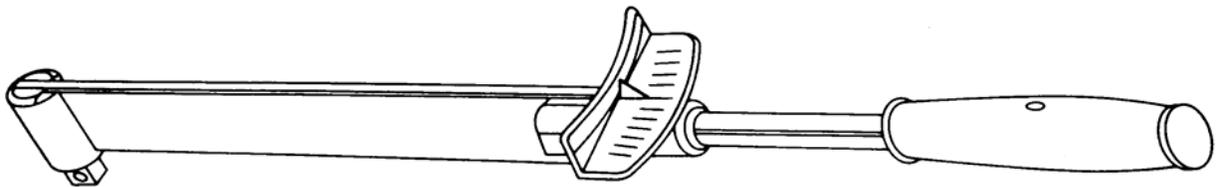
Type I, class 1, style A torque wrench, deflecting beam with indicator plate (direct reading).
